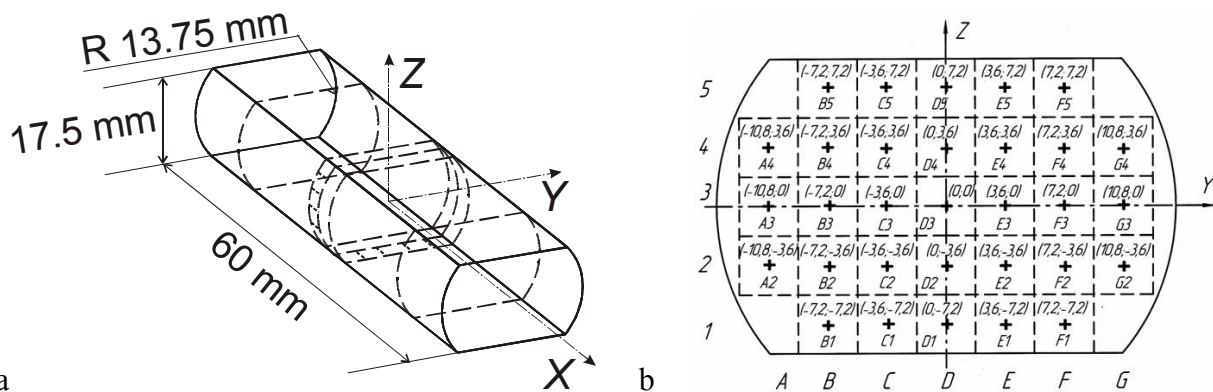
(a) Scheme and coordinate system of a billet for twist extrusion;  $X$  is direction of extrusion; dashed lines show cutting lines for tensile test specimens. (b) Plan of billet cutting on a cross-section and map of tensile specimens.
